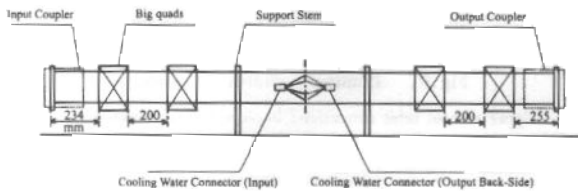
Side-view of accelerating tube and locations for big bore quads.
